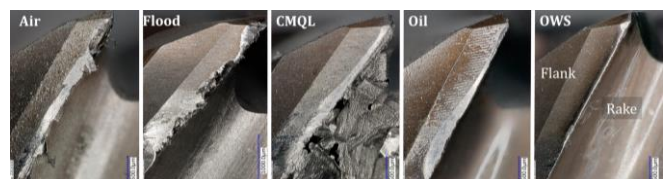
End of test tool wear images from the $150\ \text{m/min}$ cutting condition.
